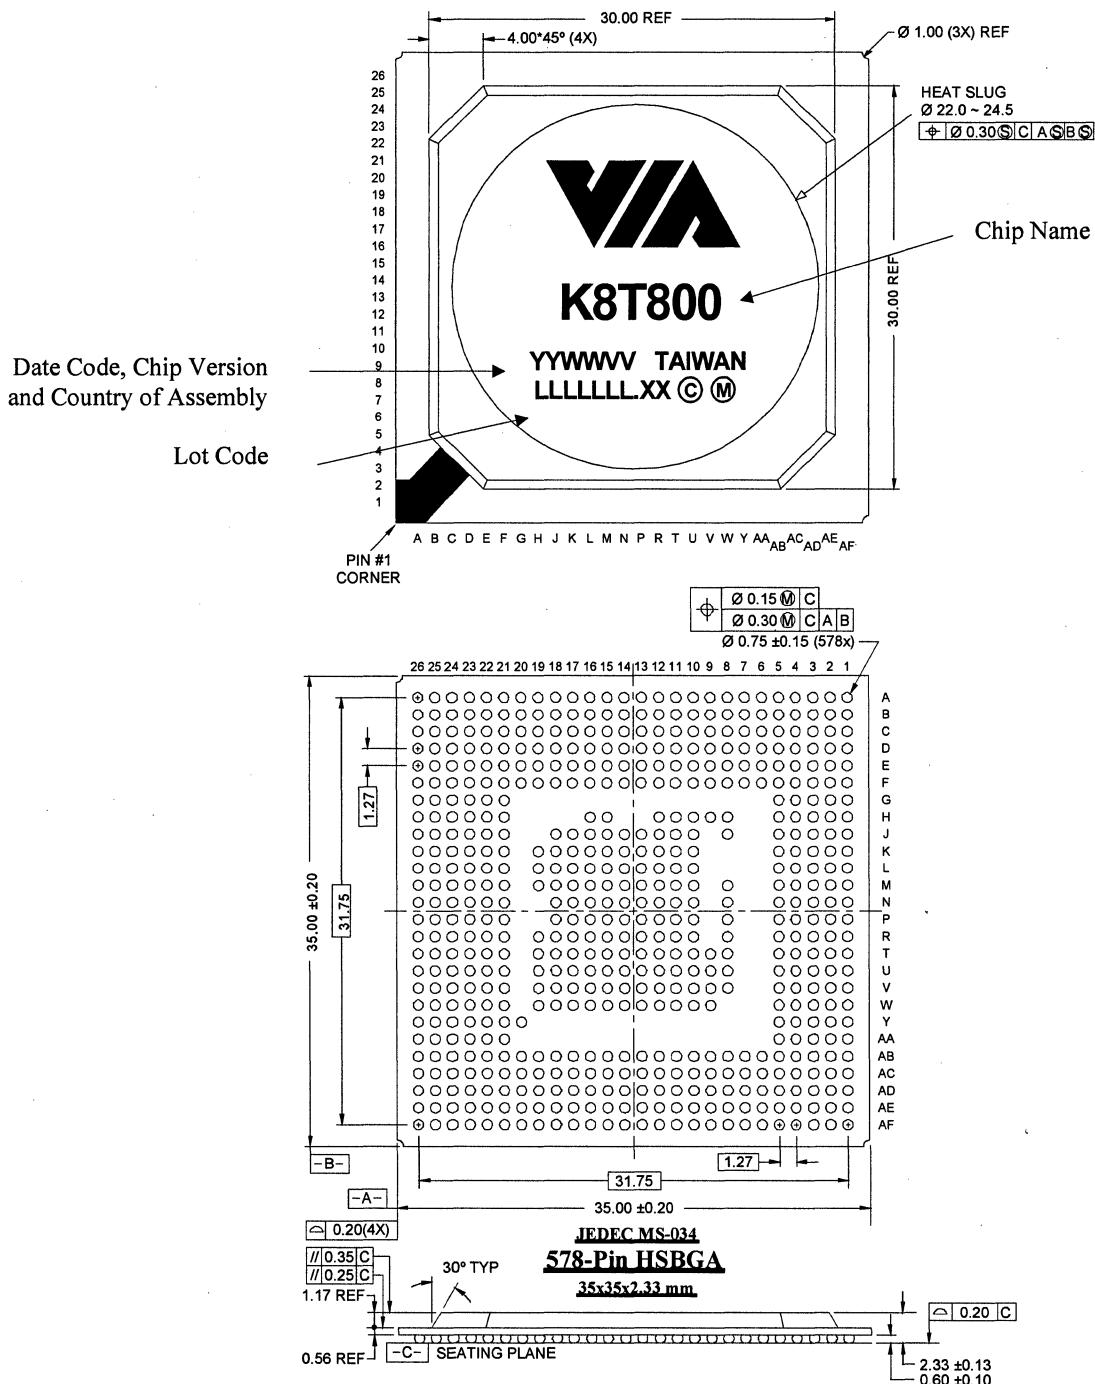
Mechanical Specifications – HSBGA-578 Ball Grid Array Package
